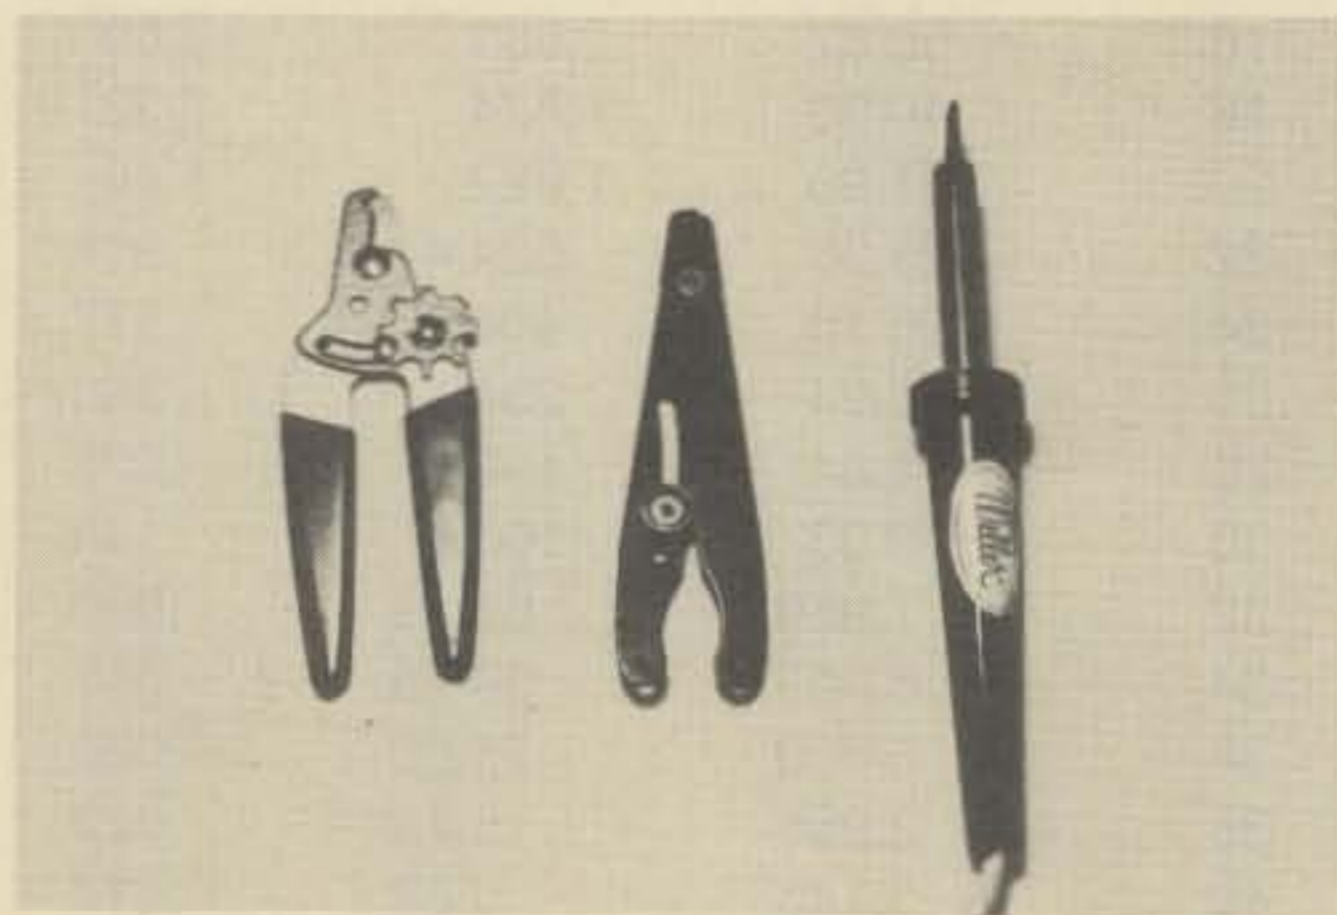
Wire strippers (left). Wire stripper blades cut through insulation but not the wire. (Right) Standard type of soldering iron. A wire stand is used to rest the hot iron when it is not in use.
